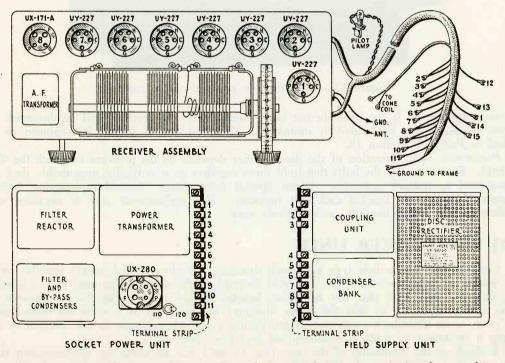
Radiotron socket contacts, location of parts, connection lugs and terminal strips of the socket power and field supply units
